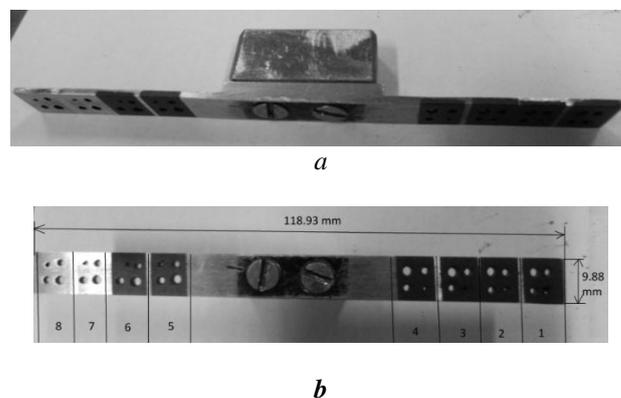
Tool electrode used in the experimental research (a) and the aspect of the tool electrode active surface after the electrical discharge machining process (b)
